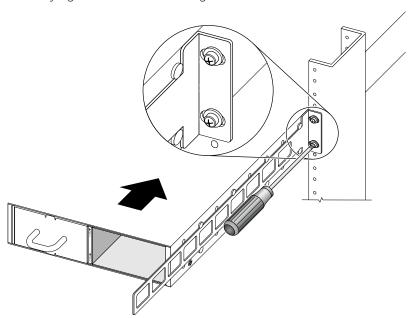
Fastening the Rear Mounting Brackets—Two-Post Rack
